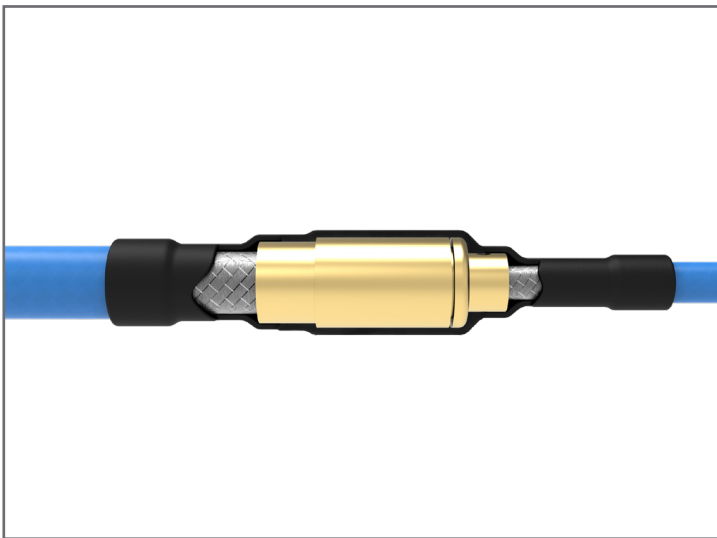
Render of soldered connection between a Ø.085" cable (left) and a Ø.047" cable (right)
